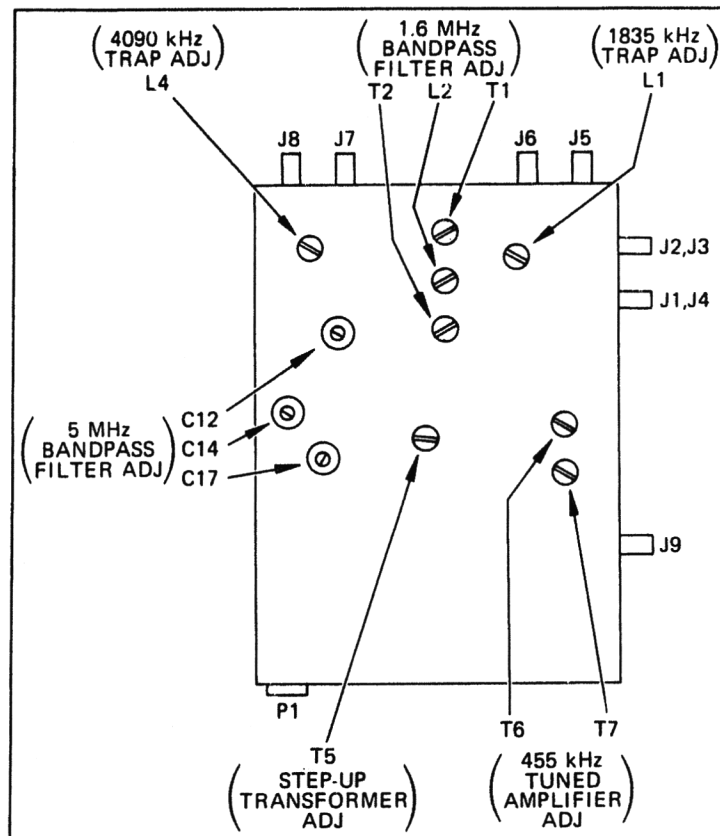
Trimmer Locations, Second Converter Assembly, A10
